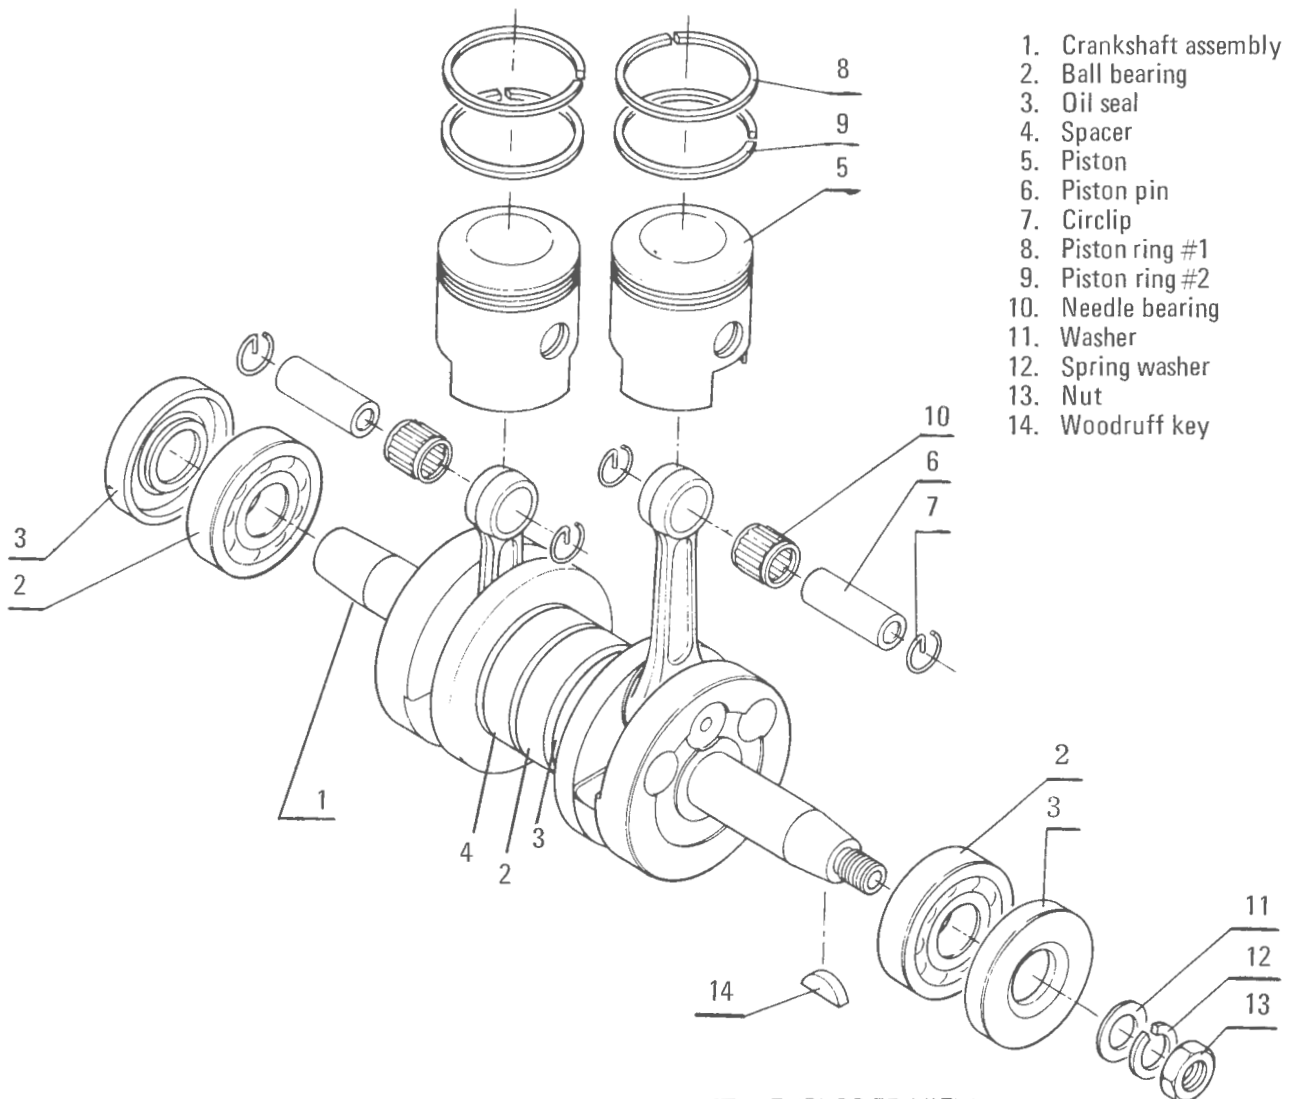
CRANKSHAFT – EXPLODED VIEW
